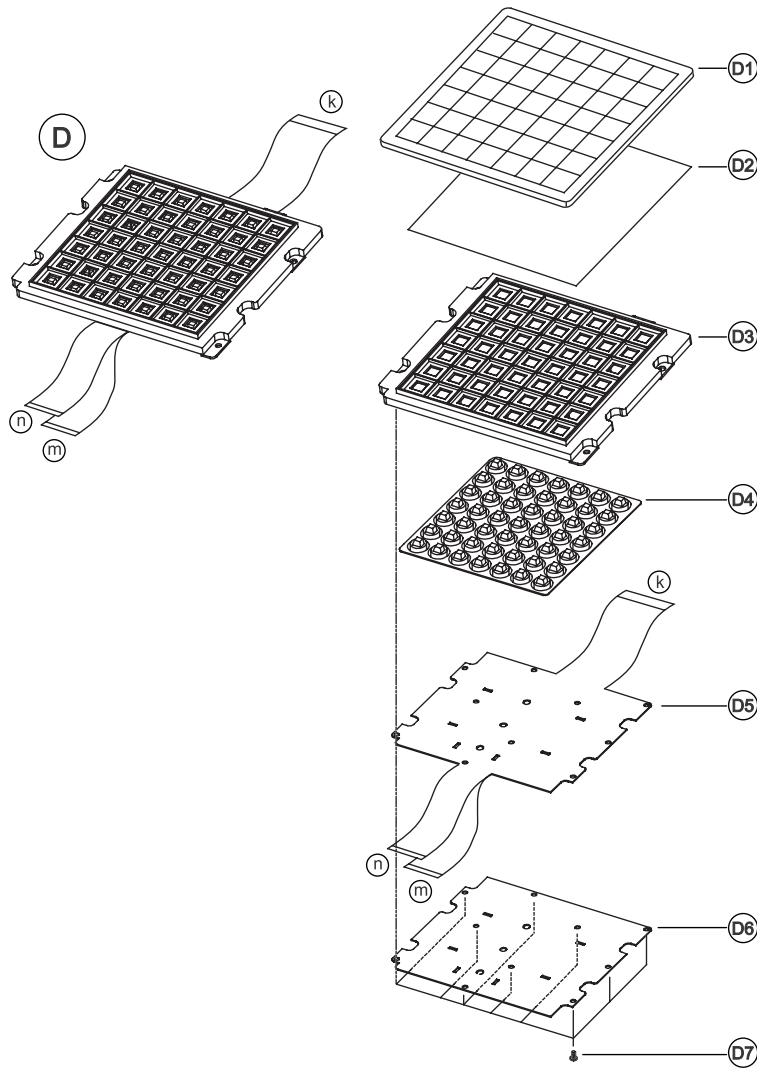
ASS'Y KEY BOARD(FLAT)
